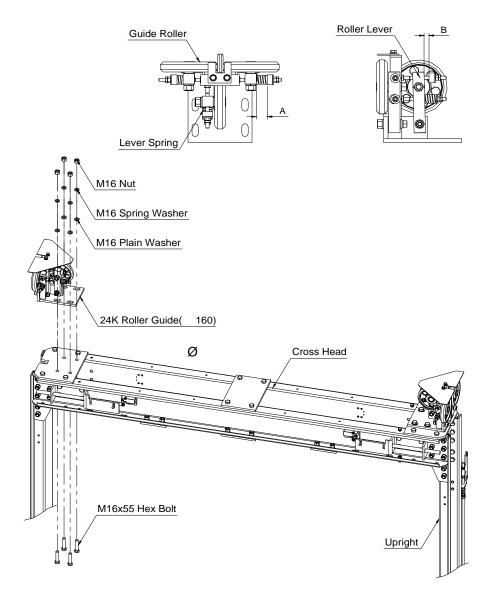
TOP GUIDE ROLLER INSTALLATION (Underslung Corner post type)
